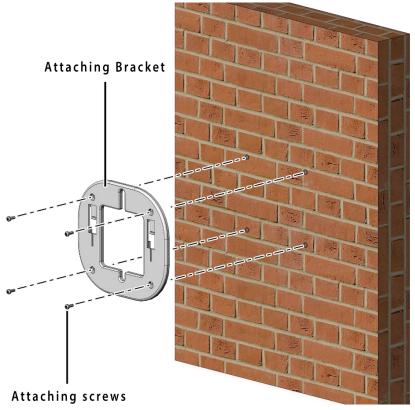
Attaching bracket on to the wall or ceiling for indoor AP
